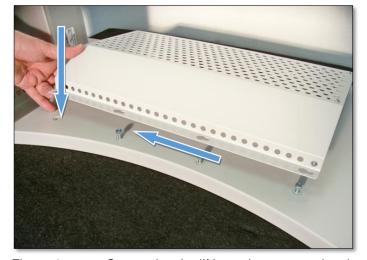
Connecting lifting column; connect earthing cable, secure cable with cable tie.
